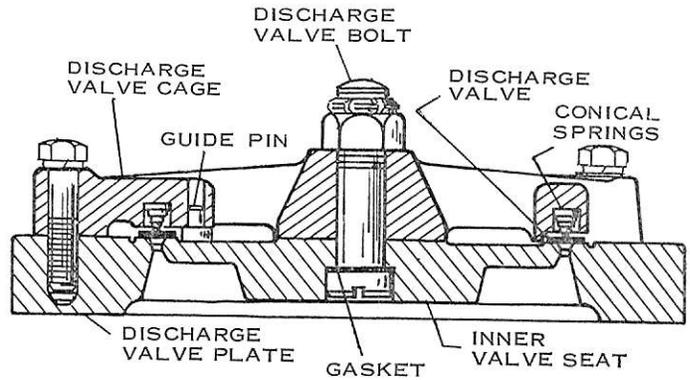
Discharge Valve Cage and Valve Plate - Non-Unloading Cylinders
